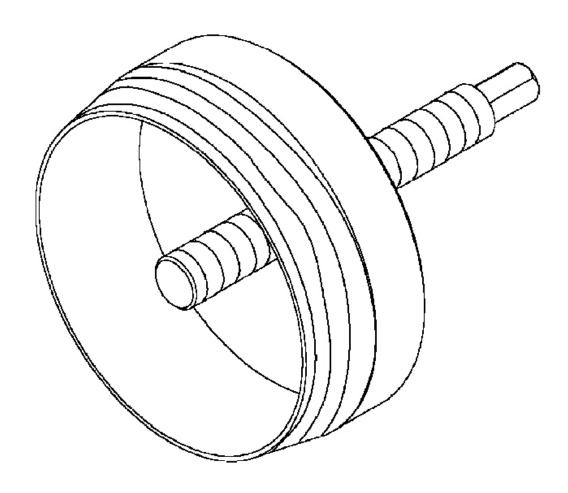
Rear Crankshaft Seal Installer 8349 Courtesy of CHRYSLER LLC
